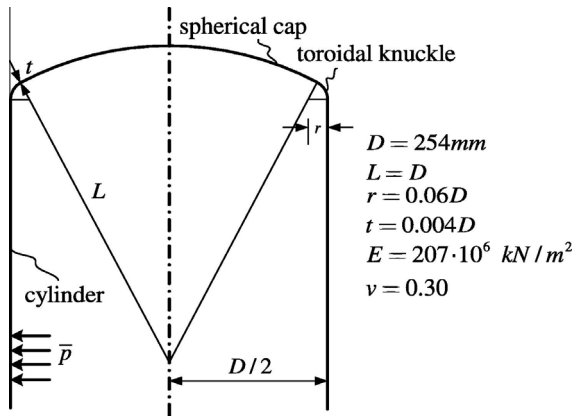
Geometrical details of a cylindrical pressure vessel with a torispherical head [8].
